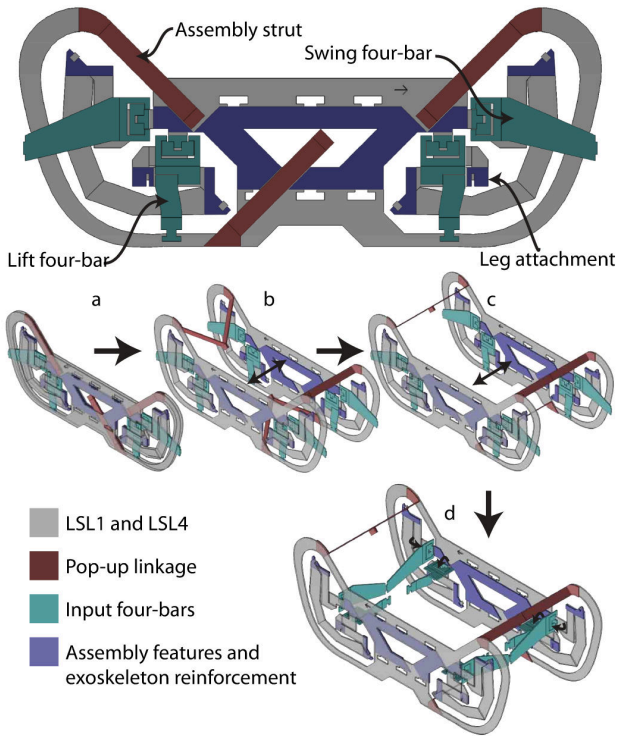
Sub-laminates LSL2 and LSL3 comprise the pop-up assembly linkages, four-bar transmissions, and additional assembly features. The released pop-up linkage assembly (a) allows separation of the two robot halves (b,c), LSL1 and LSL4. After pop-up assembly, the eight input four-bars are deployed by 90° folds (d).
